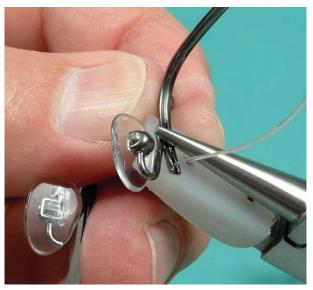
The cord is threaded into the lower hole from the inside and back into the upper hole.
